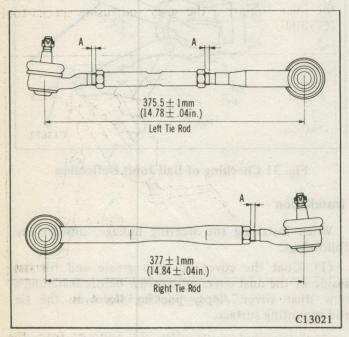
Dimensions of Tie Rod and Tie Rod Ends Assembled
